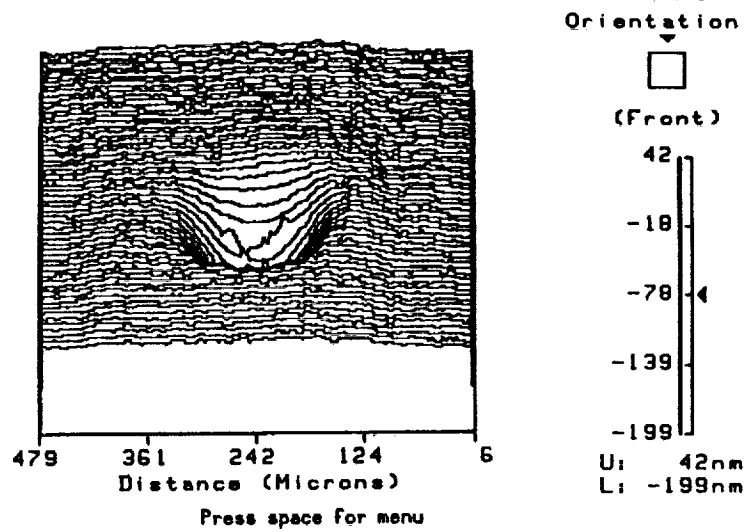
Residual surface defect left in mandrel after measurement with the CMM.
